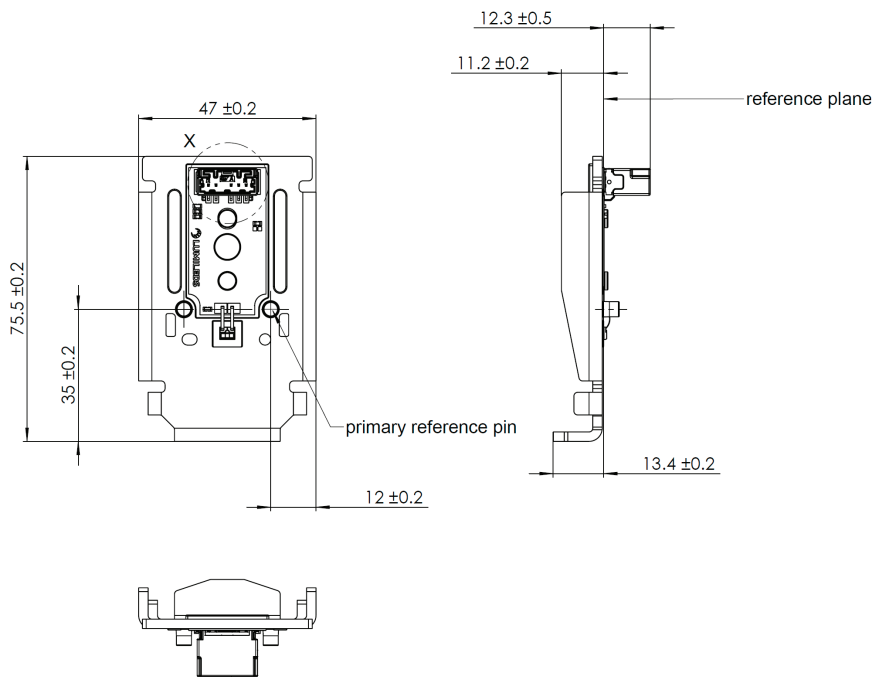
Mechanical dimensions in mm of the LUXEON Go 1x3 master module with heatsink type C
